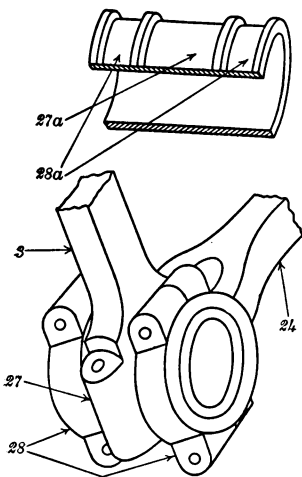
ONE CAM OPERATING INTAKE VALVE RODS FOR TWO DIFFERENT CYLINDERS
